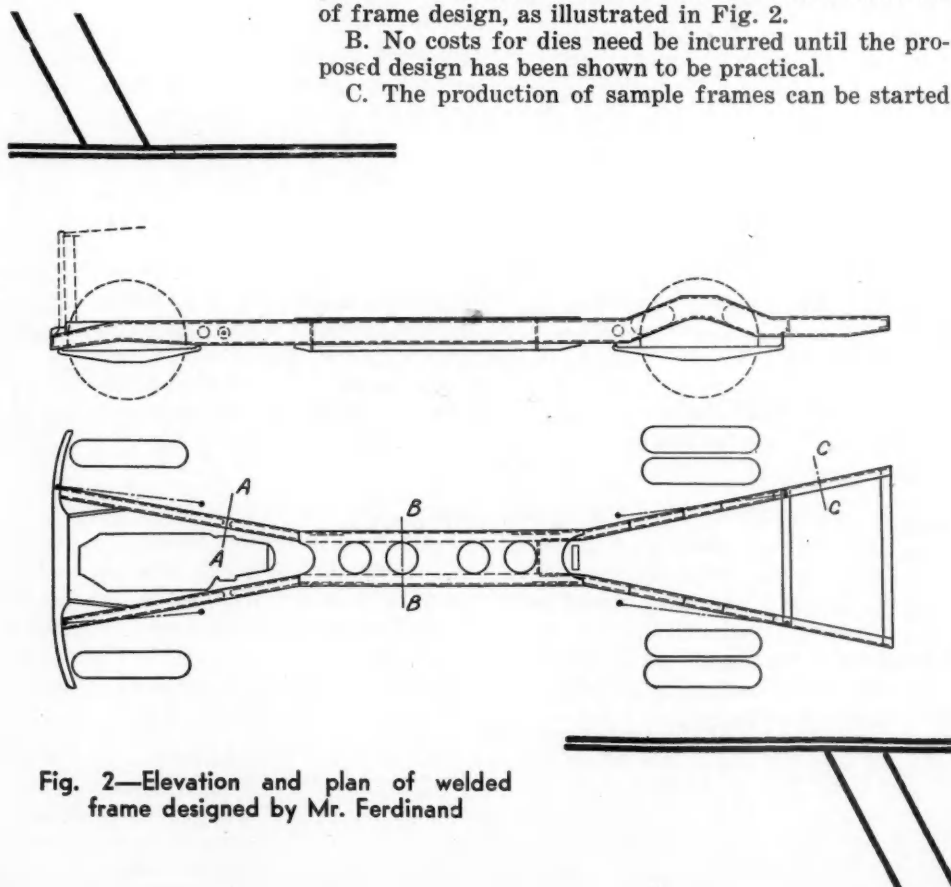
Elevation and plan of welded frame designed by Mr. Ferdinand
